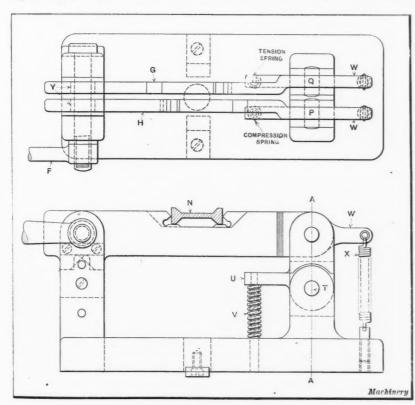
Supporting Fixture used in Conjunction with Clamping Fixtures when milling Slender Parts
